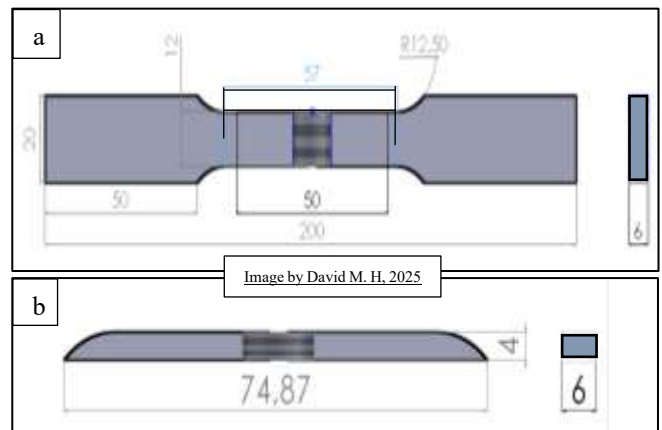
(a) Dimensions of tensile test samples, (b) Dimensions of microstructure test samples
